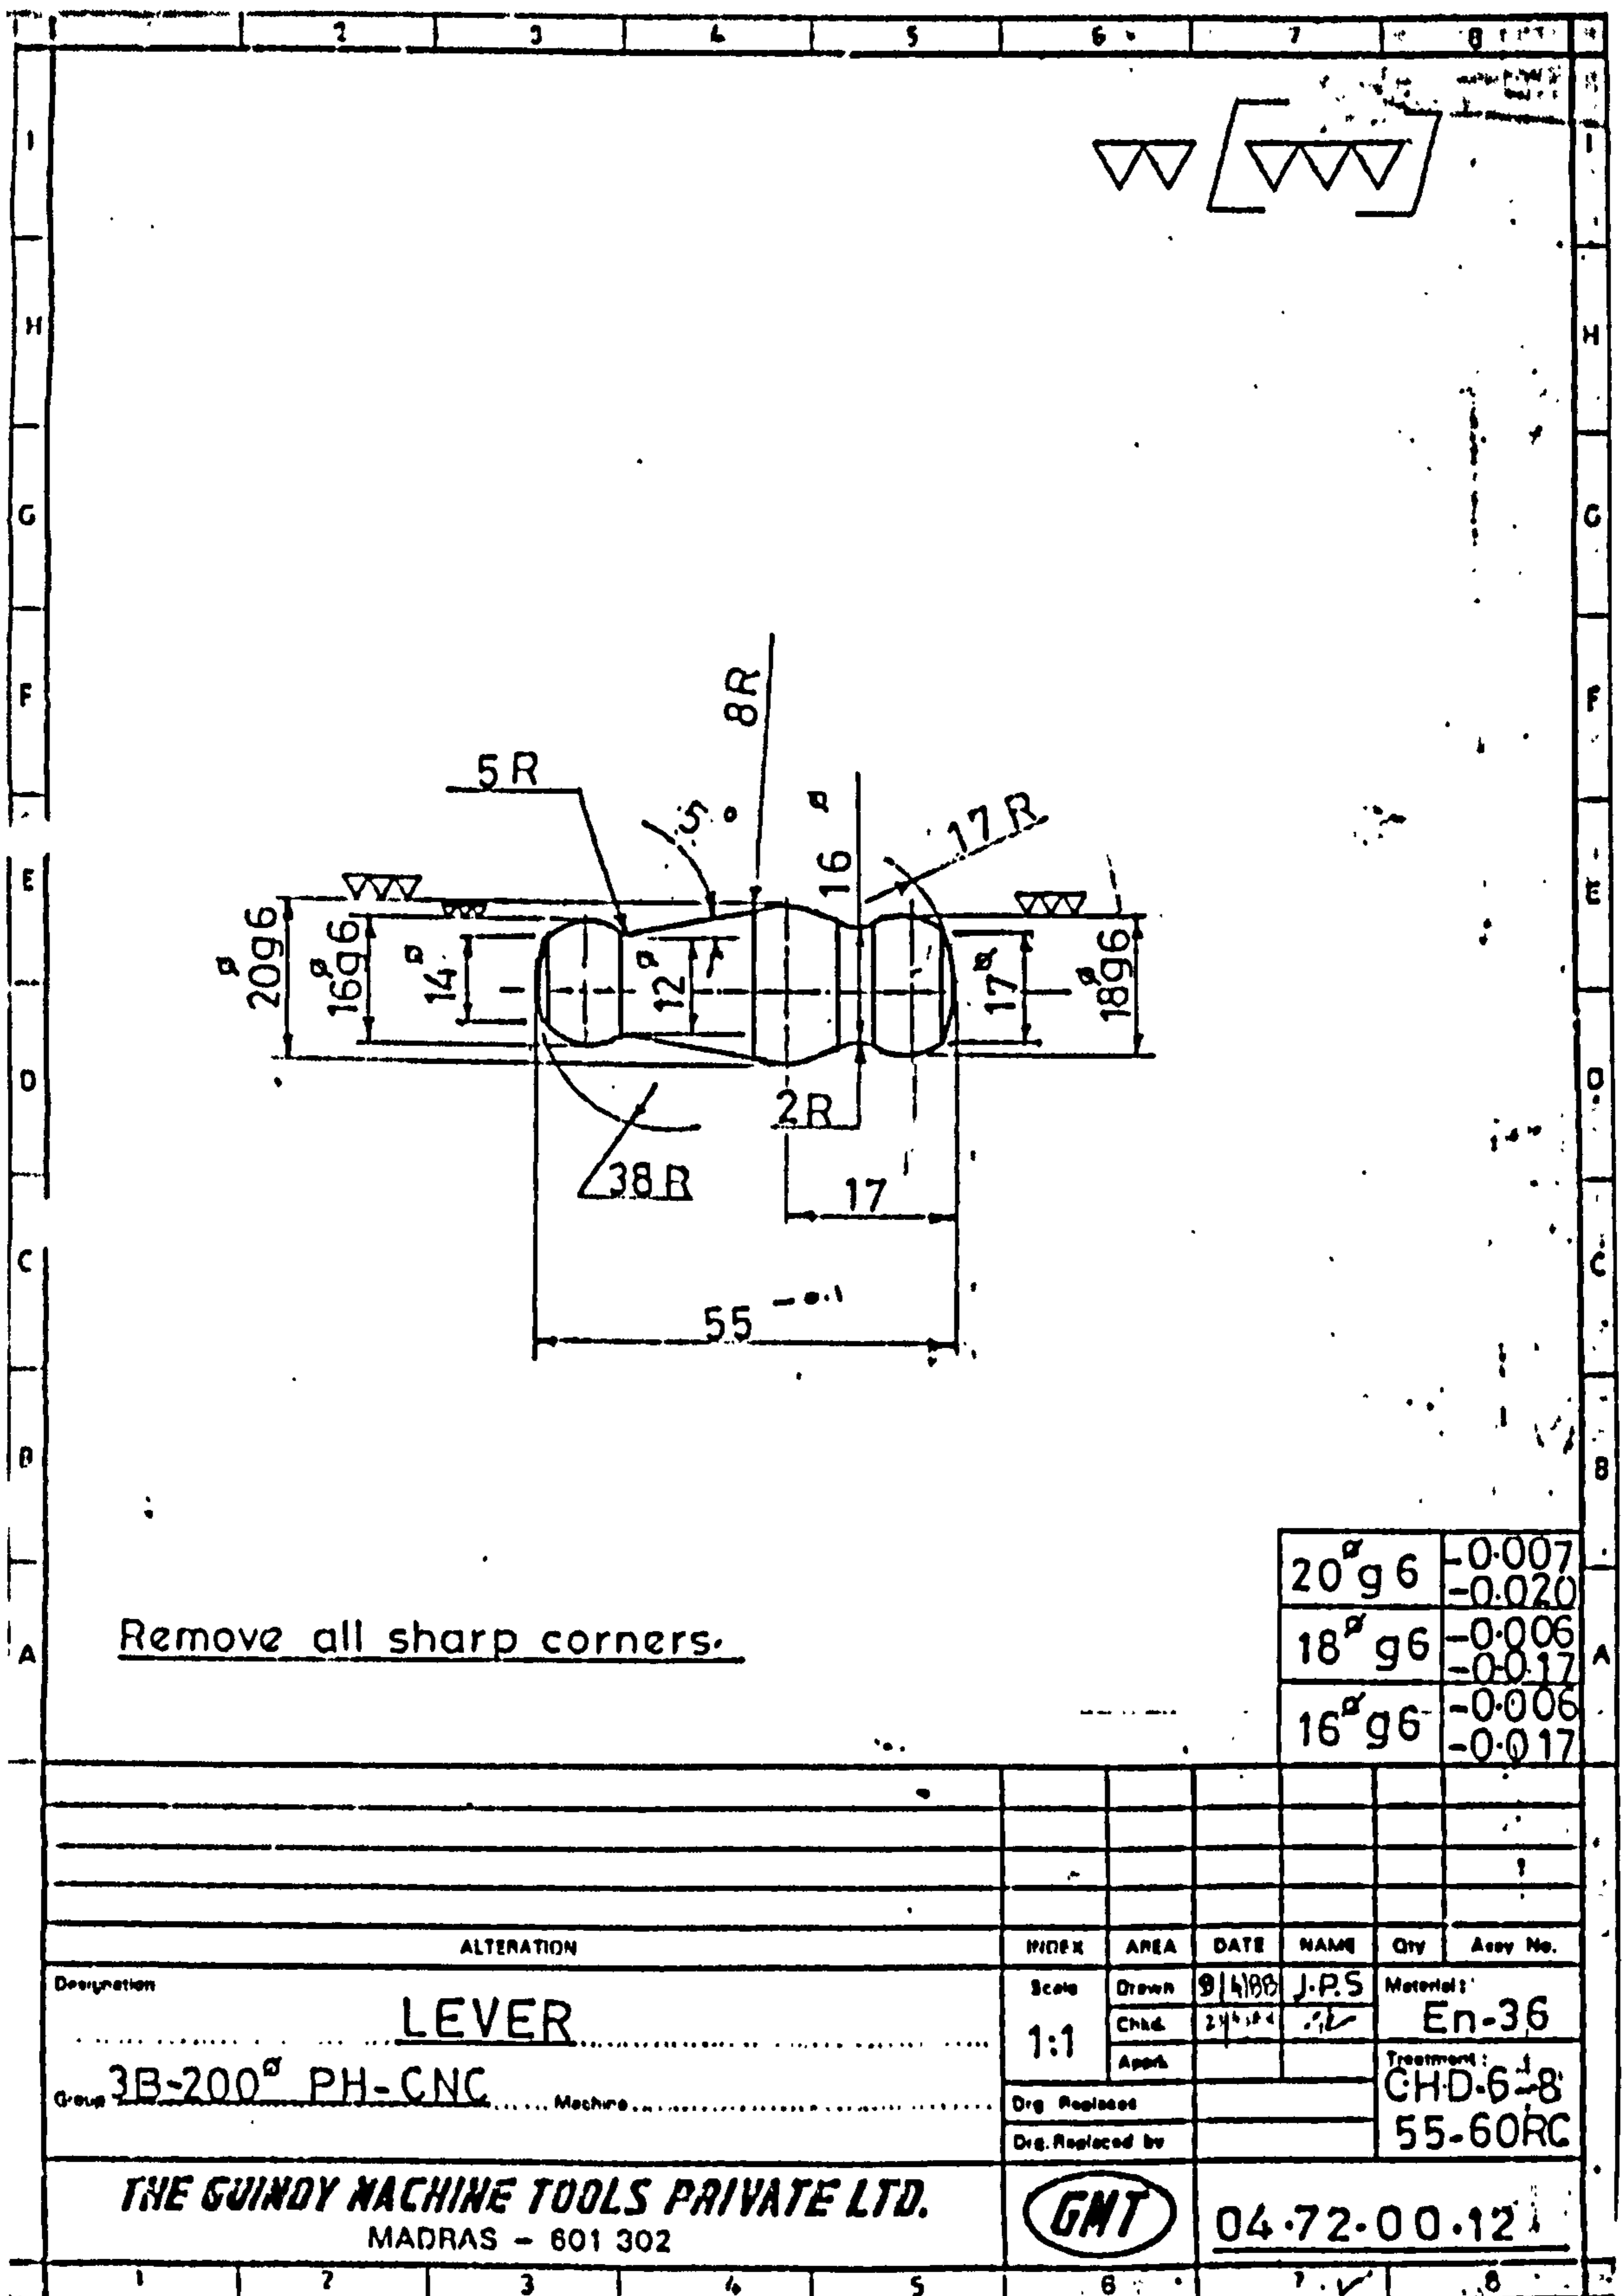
GMT Chuck Lever – Example Manufacturing Drawing
